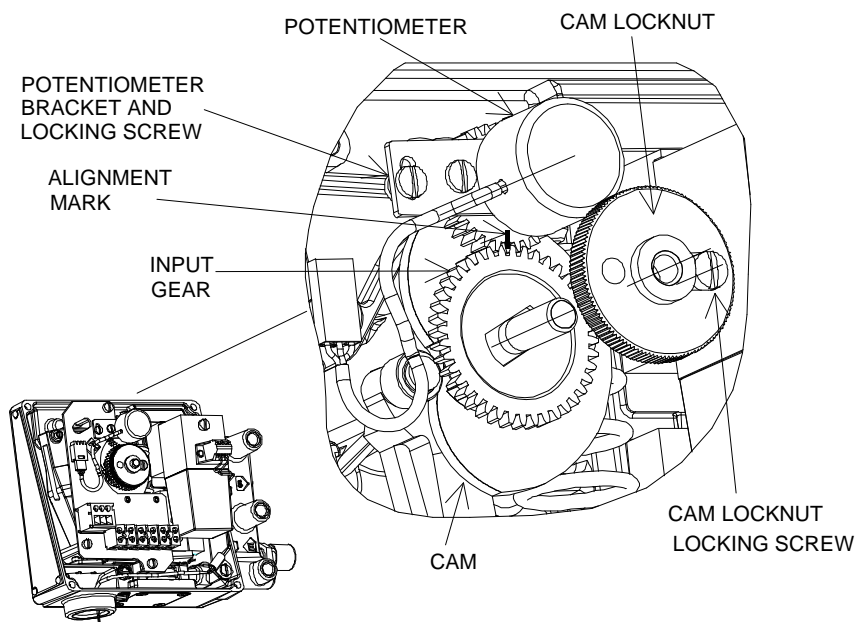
Potentiometer Gear Bracket Alignment
